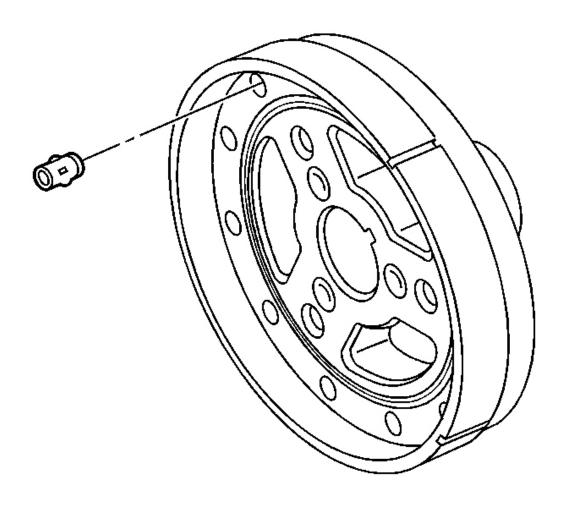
View Of Crankshaft Balancer Weights Courtesy of GENERAL MOTORS CORP.
